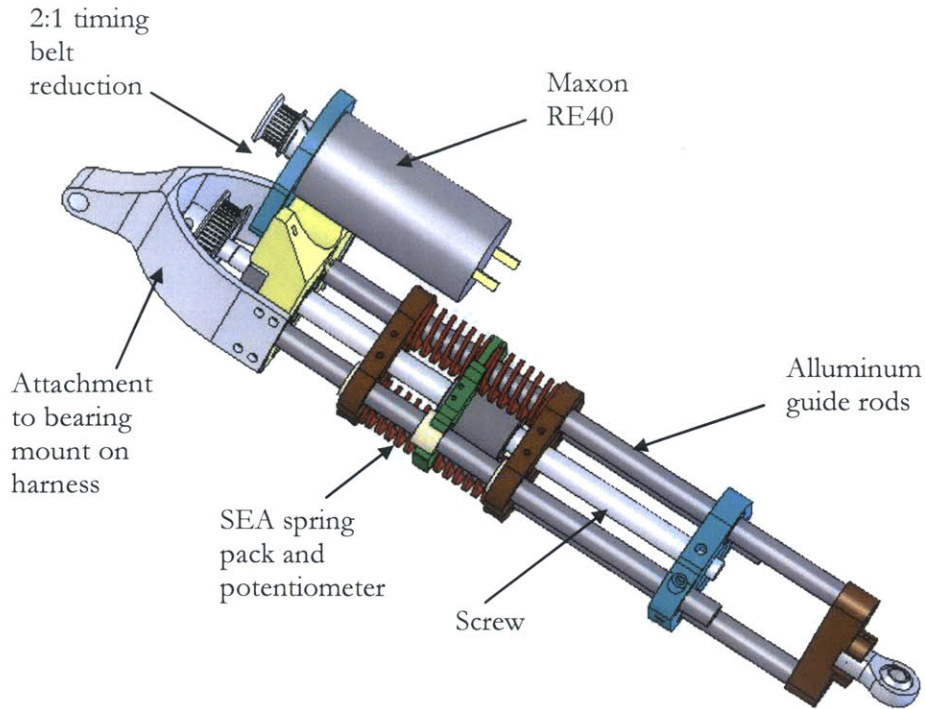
CAD model of the linear series elastic actuator showing the key components.
